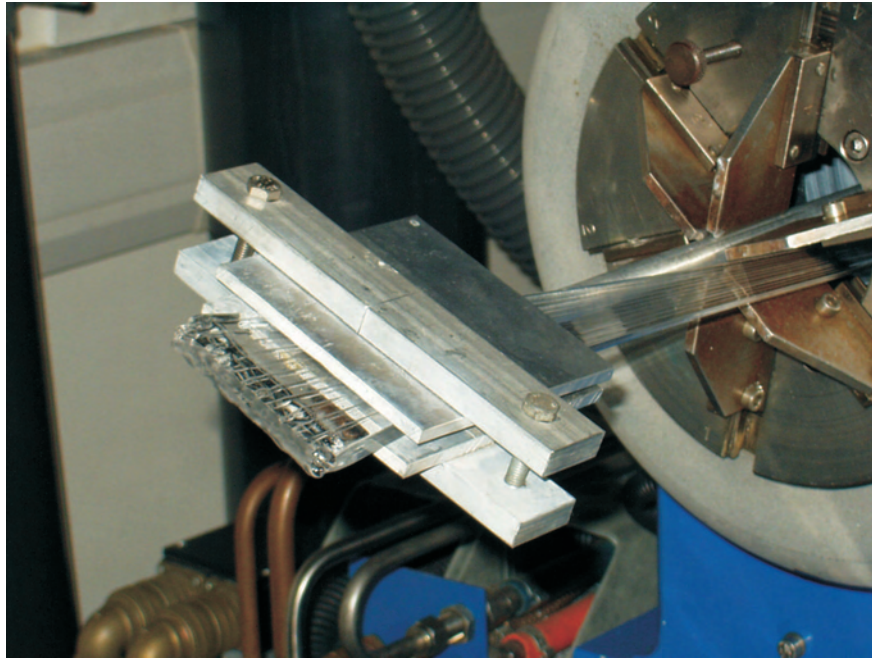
Clamps were designed and fabricated to allow rectangular glass to be firmly held whilst welding was performed. The devices were designed to connect to the existing glass working lathes allowing rotation of the preform to access all sides.
